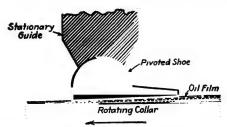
Diagrammatic sketch illustrating principle of Kingsbury thrust bearing.
